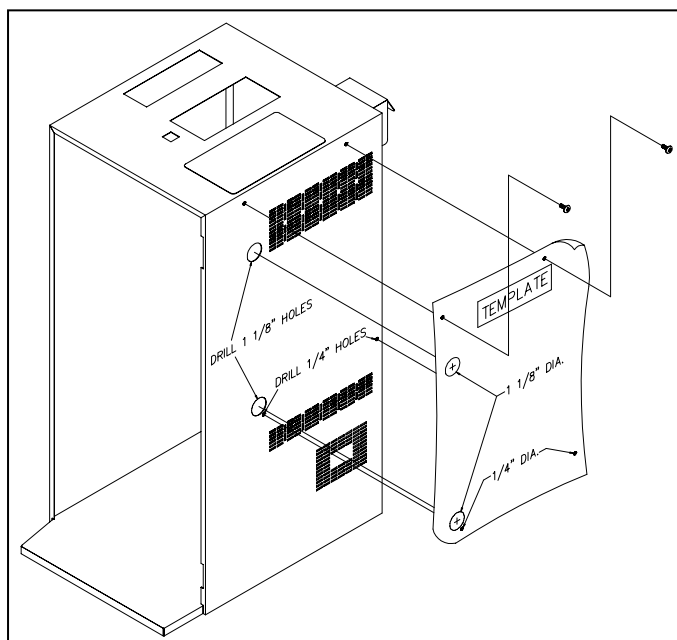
Using the larger paper template, mark the location of the holes to be drilled on the side of the machine.
